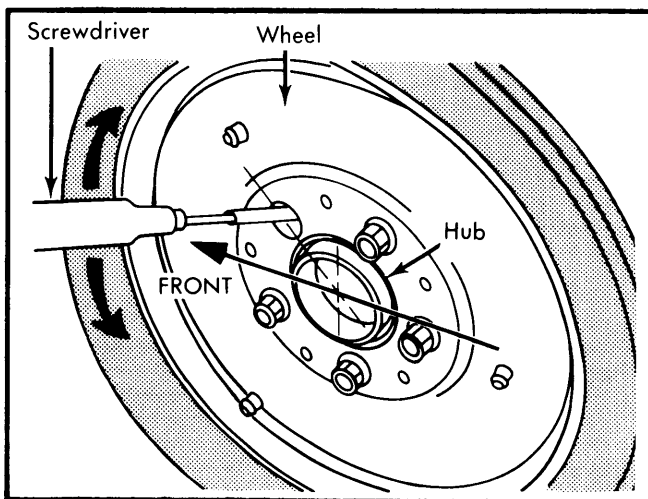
Fitting Parking Brake Adjuster Tool Into Adjusting Mechanism
